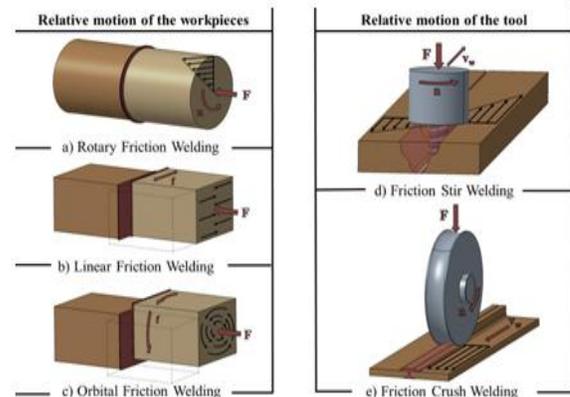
Various types of classification of Friction welding by Besler *et al.*, 2016 [1]
